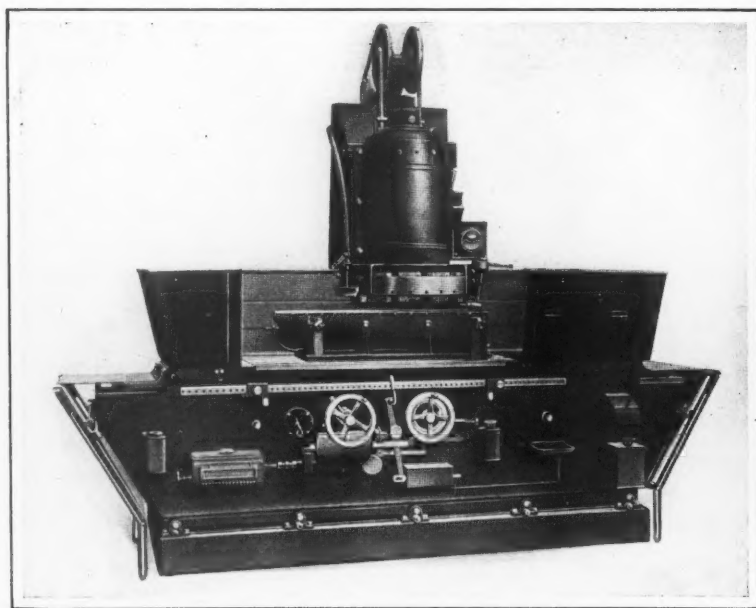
Surface Grinding Machine Placed on the Market by L. Sichel
